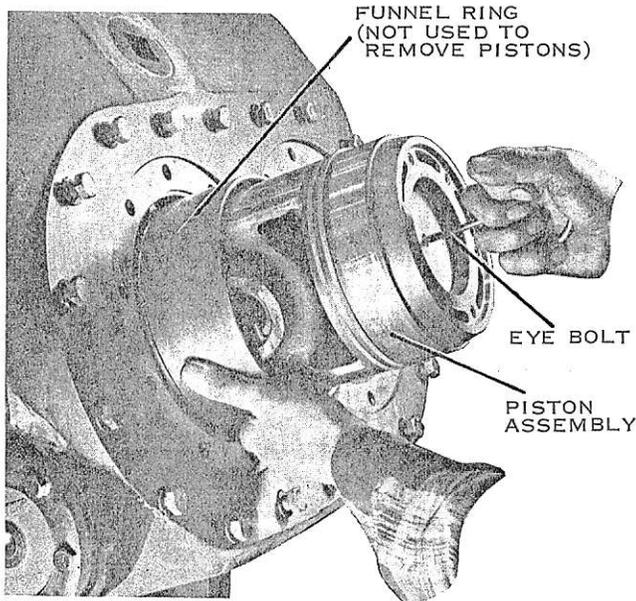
Installing Piston and Connecting Rod Assembly in Cylinder
